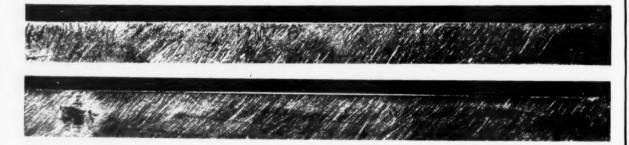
Inner Surfaces of Cutting Edges of Tensile Test Dies: (Top) Photograph of the Standard Die: (Bottom) Photograph of the Special Die
